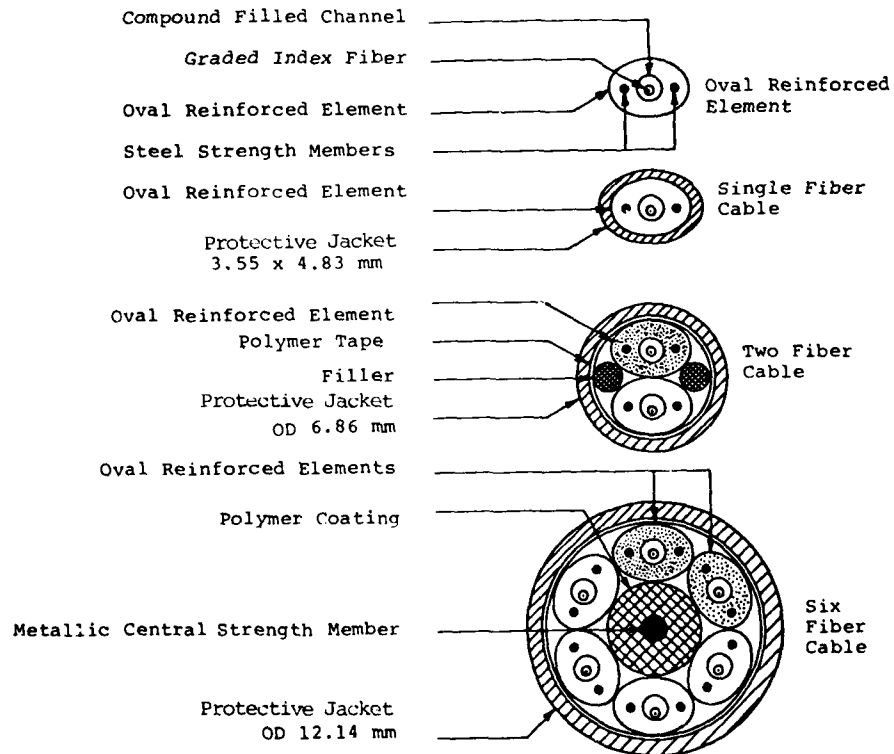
Cross Sectional Sketches of Oval Reinforced Element and of Representative Multi-Fiber Ruggedized Cables.
